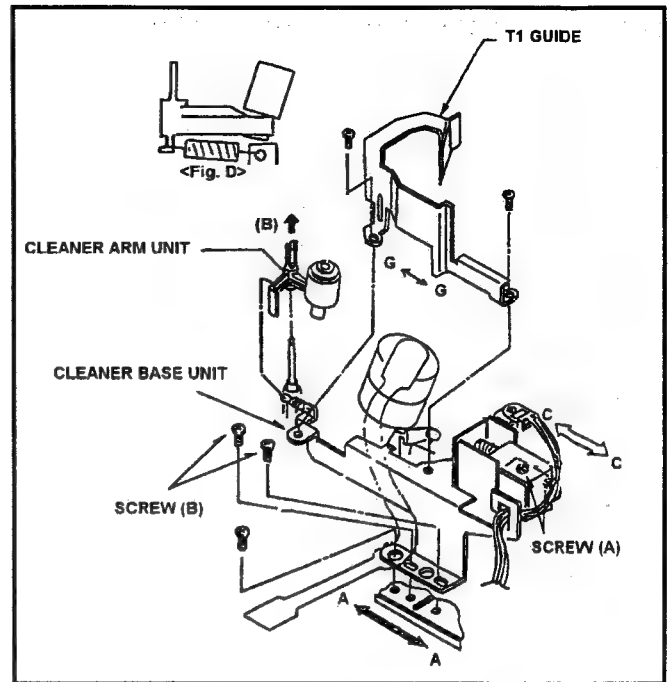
Cleaner Solenoid Position Adjustment
